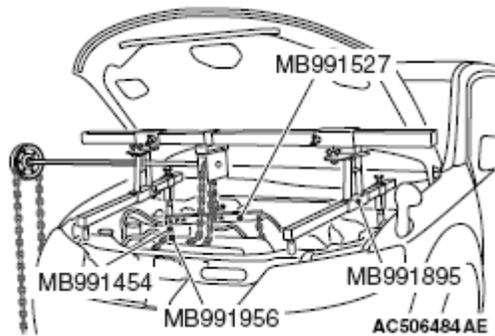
Identifying Special Tool Engine Hanger (MB991454 Or MB991995)
